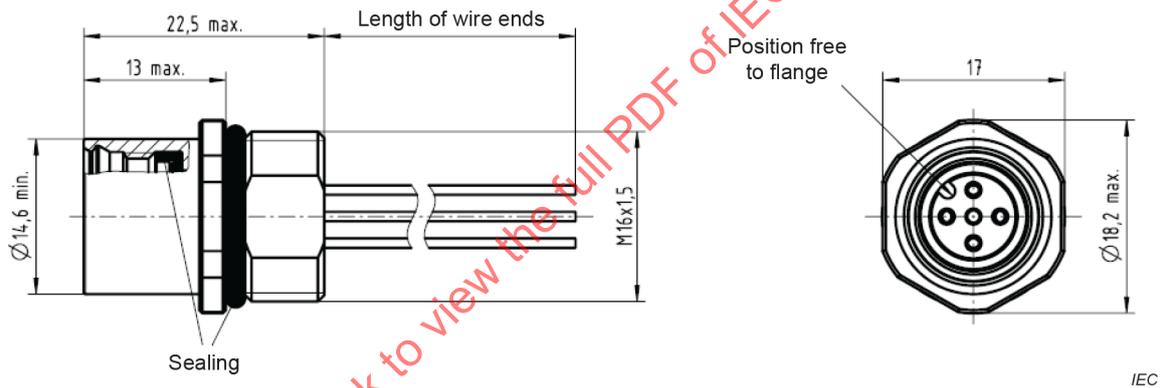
Fixed connector, female contacts, mounting with thread M12 × 1 and inner push-pull locking, with wire ends, single hole front mounting thread M16 × 1,5
